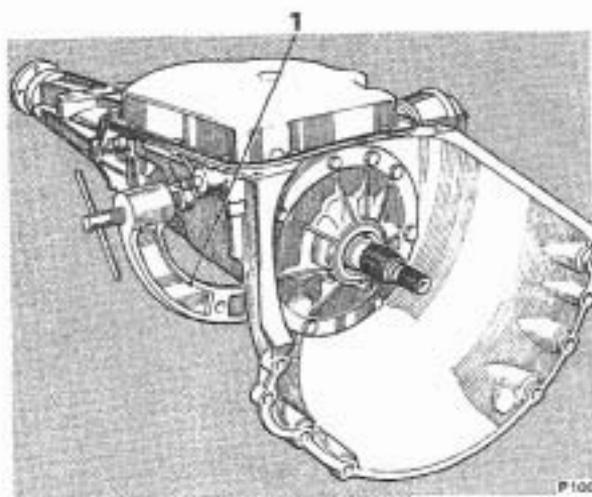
TRANSMISSION IN HOLDING FIXTURE
